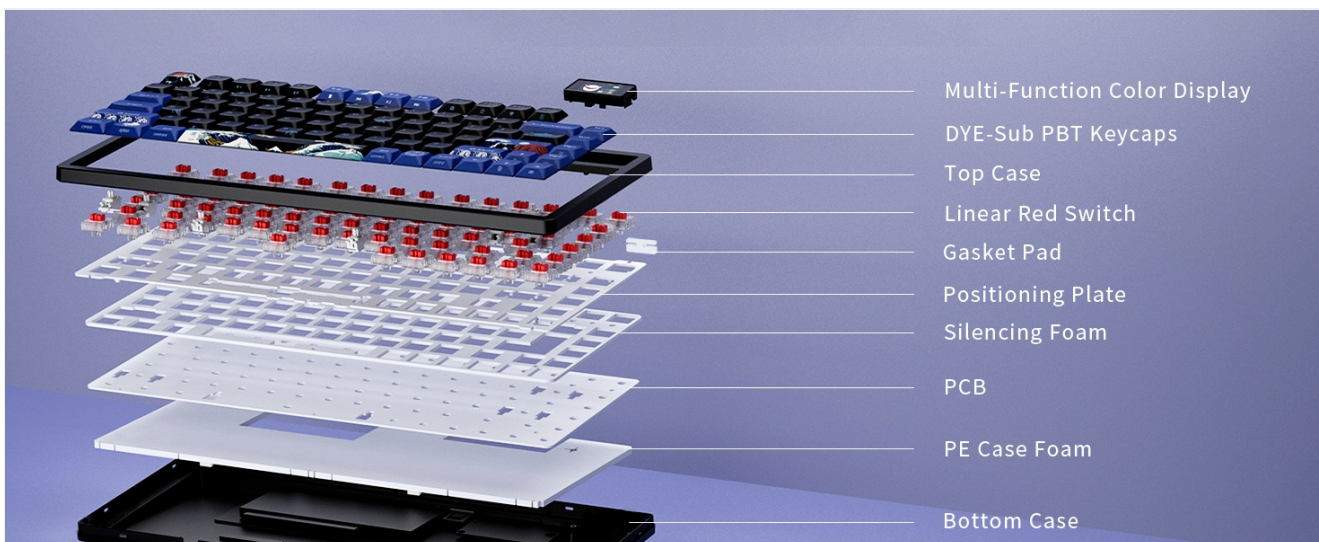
Exploded view illustrating the gasket-mount design components, including the multi-function color display, PBT keycaps, linear red switches, gasket pad, positioning plate, silencing foam, PCB, and case foam.
